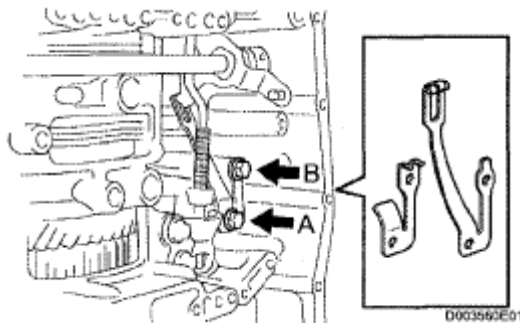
Locating Manual Detent Spring And Cover Bolts
